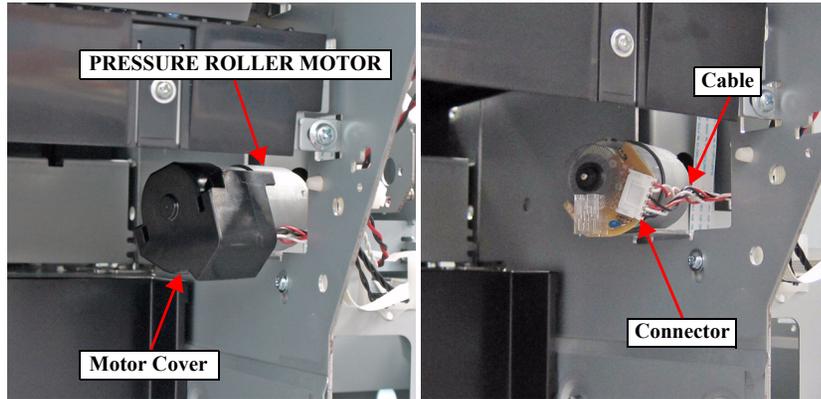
Removing the PRESSURE ROLLER MOTOR
